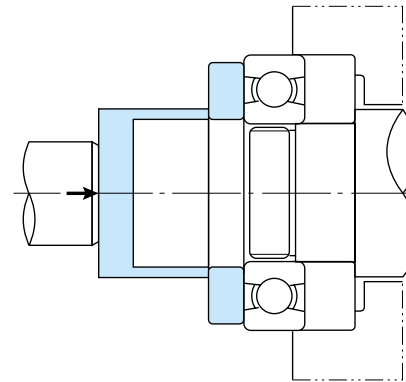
Simultaneous Press Fitting of Inner Ring
